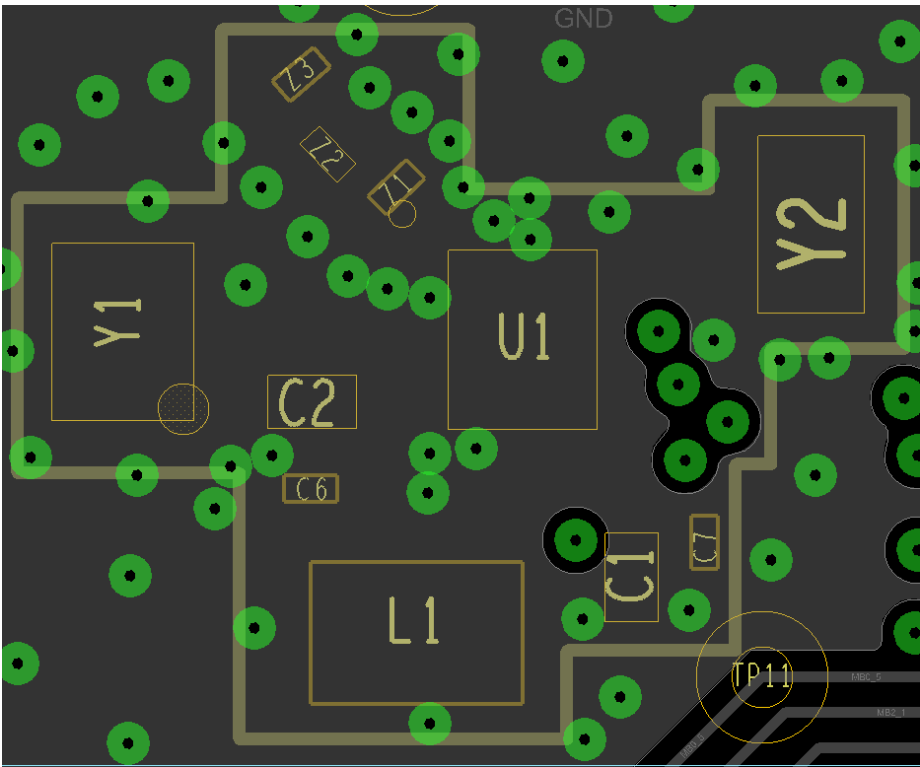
WLCSP17 PCB Placement and Routing – Bottom Layer
